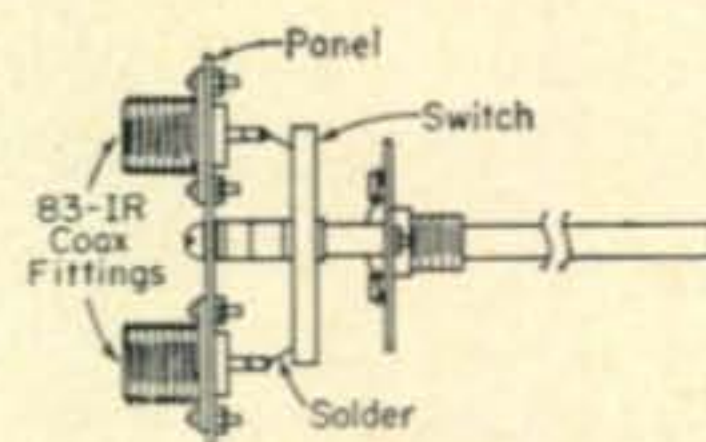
Cross section view of the Mallory 161C switch completely assembled and mounted on the front panel.
